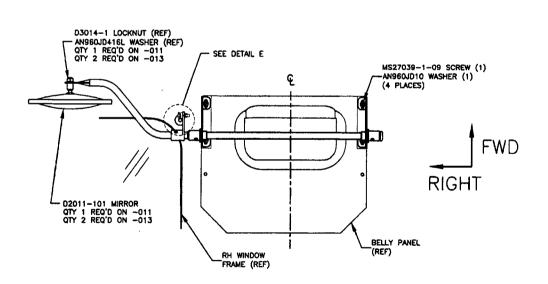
View B: Looking Up (D119-696-011 Mirror Shown, -013 similar)
